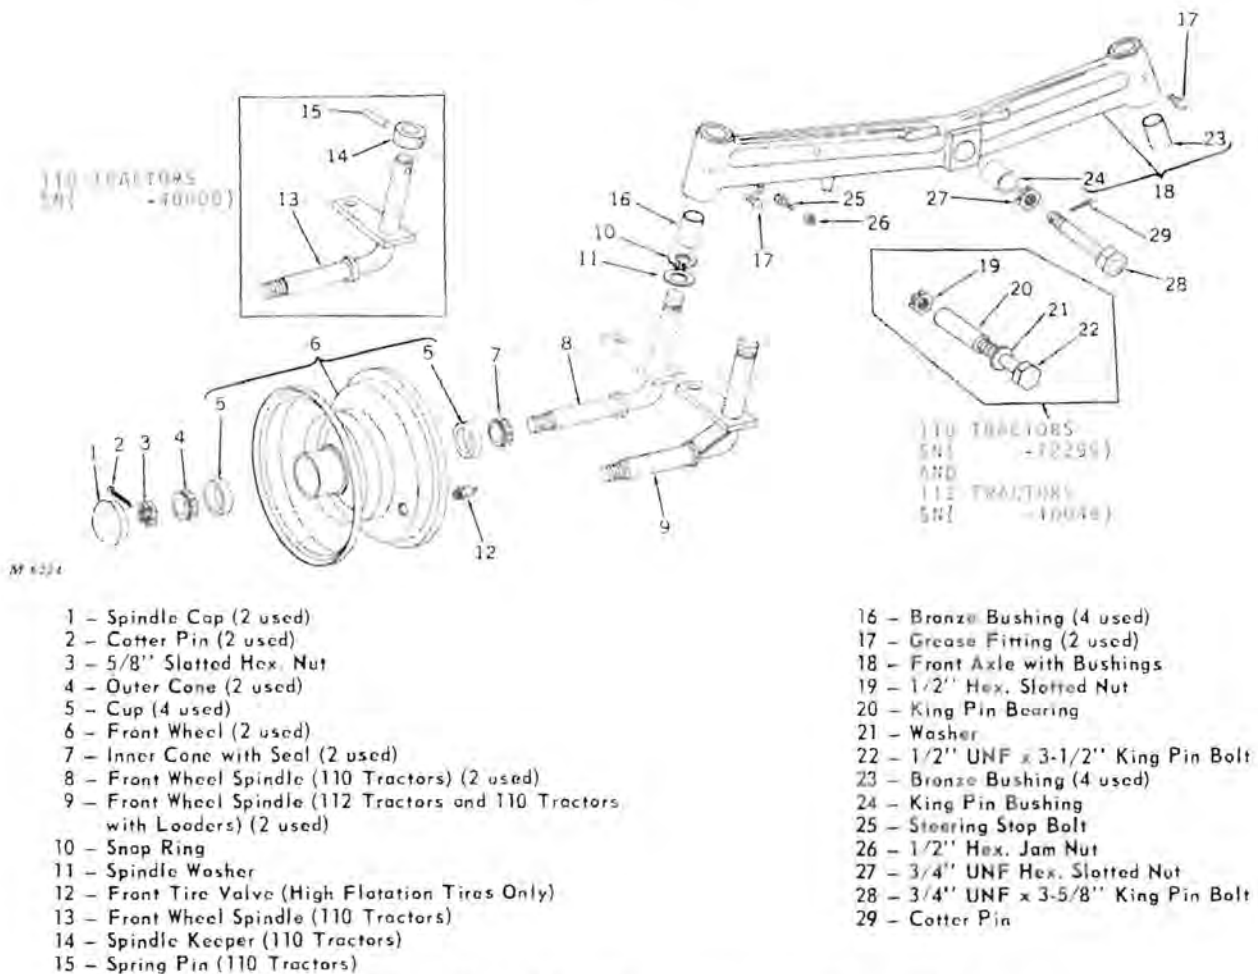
Exploded View of Front Wheels and Axles for 110 and 112 Tractors
